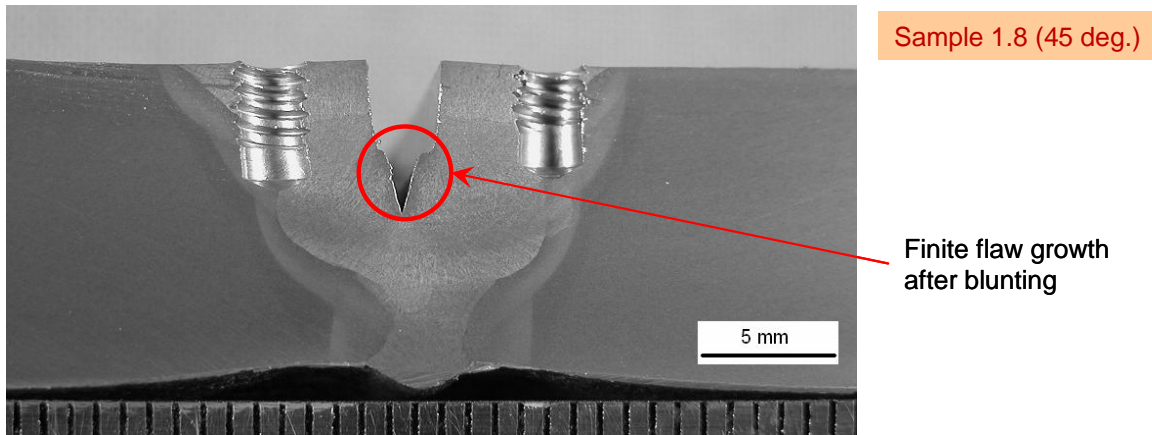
Flaw growth path of a flaw located in weld centerline
